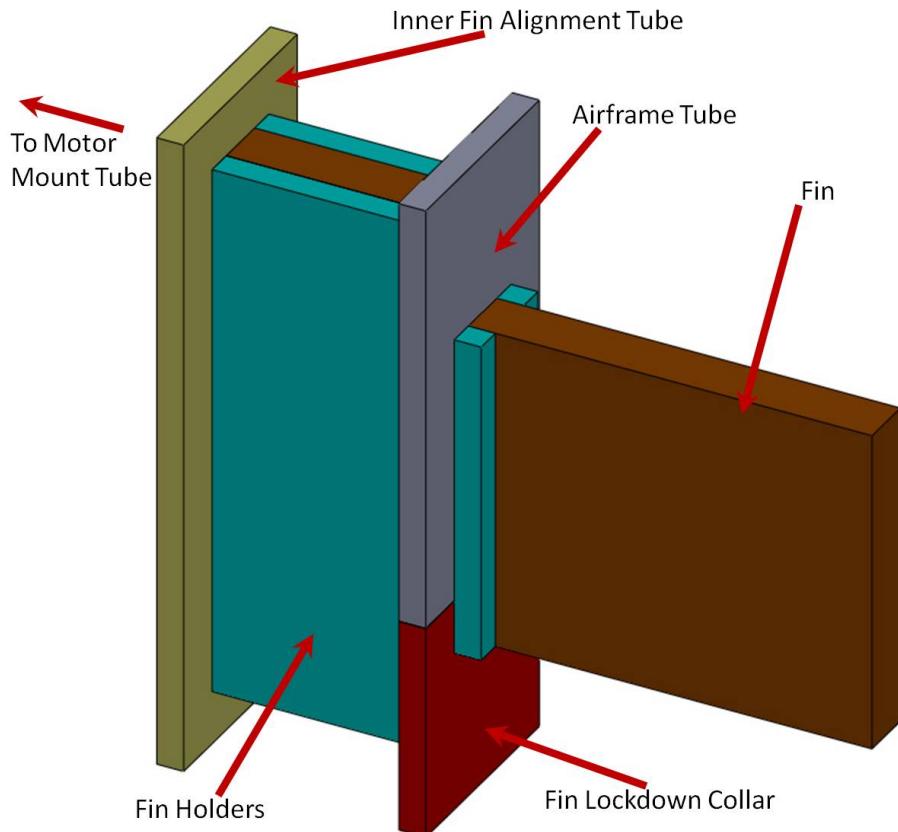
FIN ATTACHMENT ASSEMBLY MODEL
